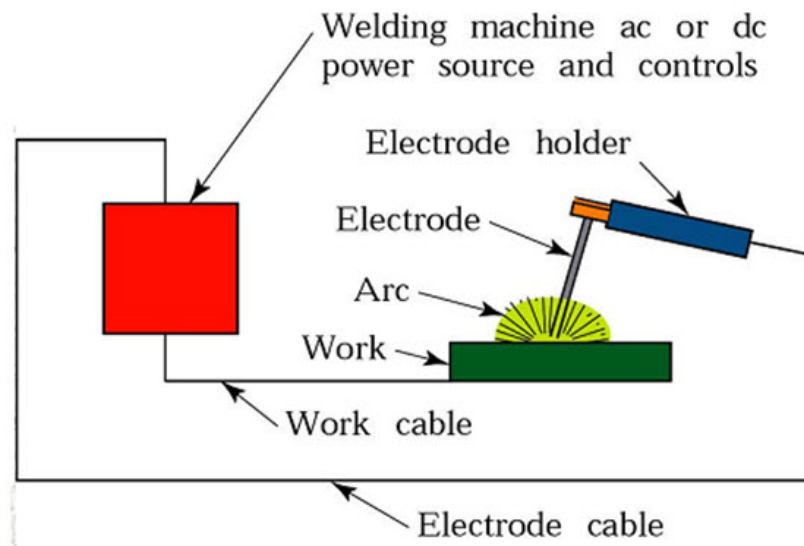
Schematic illustration of the shielded metal-arc welding operations (also known as stick welding, because the electrode is in the shape of a stick).
